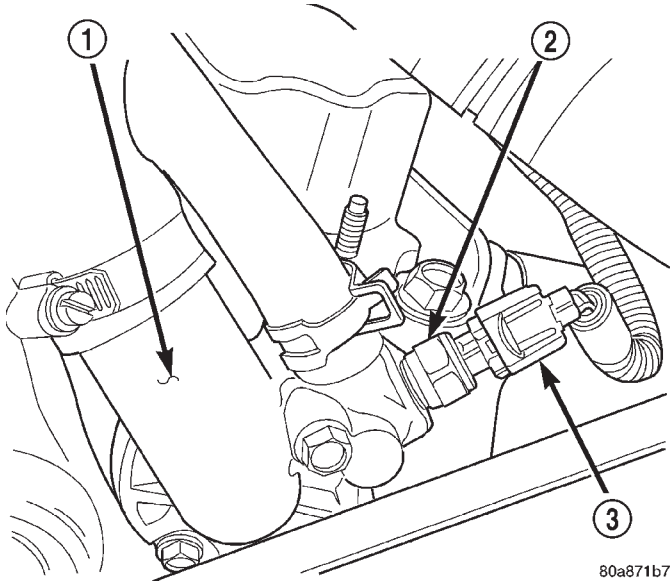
Engine Coolant Temperature Sensor—2.5L Engines
